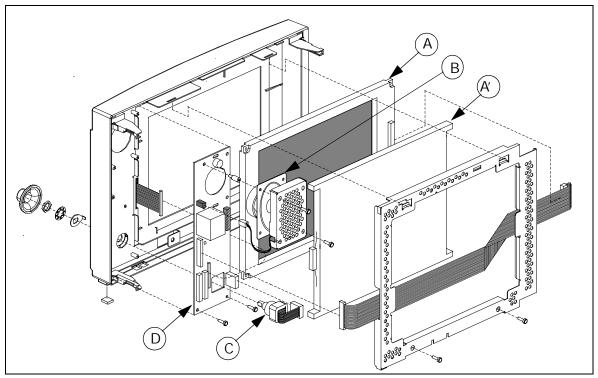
Front Panel Subassembly Exploded View, 9.5" LCD Display
